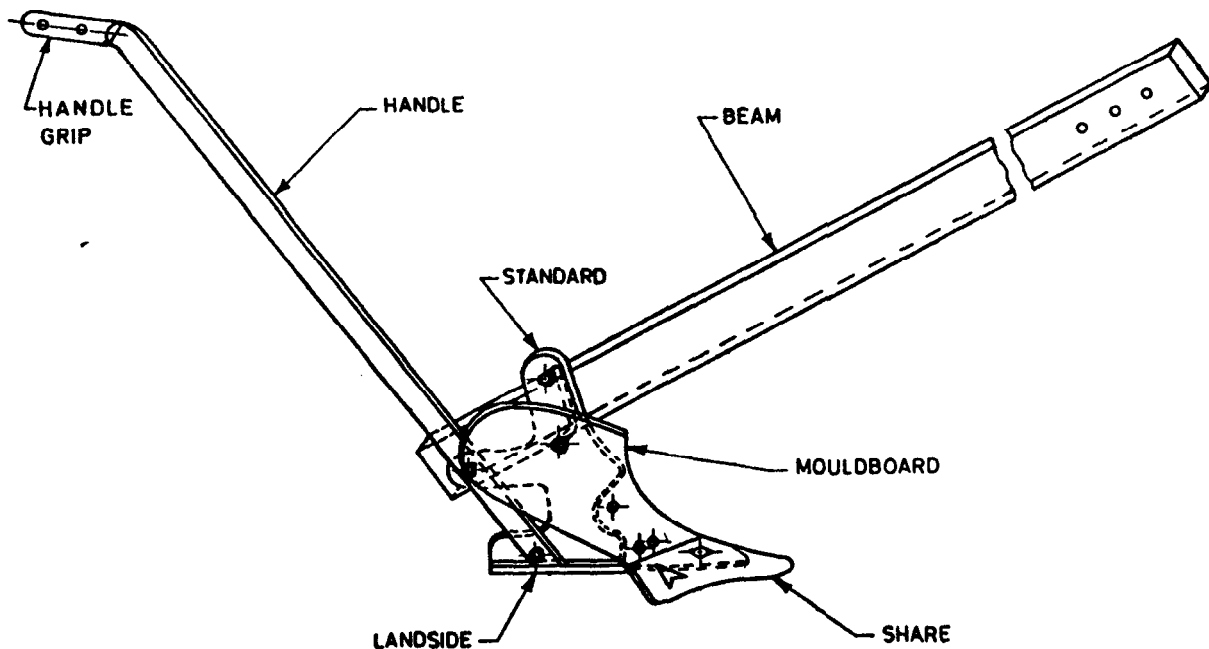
NOMENCLATURE OF MAIN PARTS OF MOULDBOARD PLOUGH, FIXED TYPE ( LONG BEAM )
